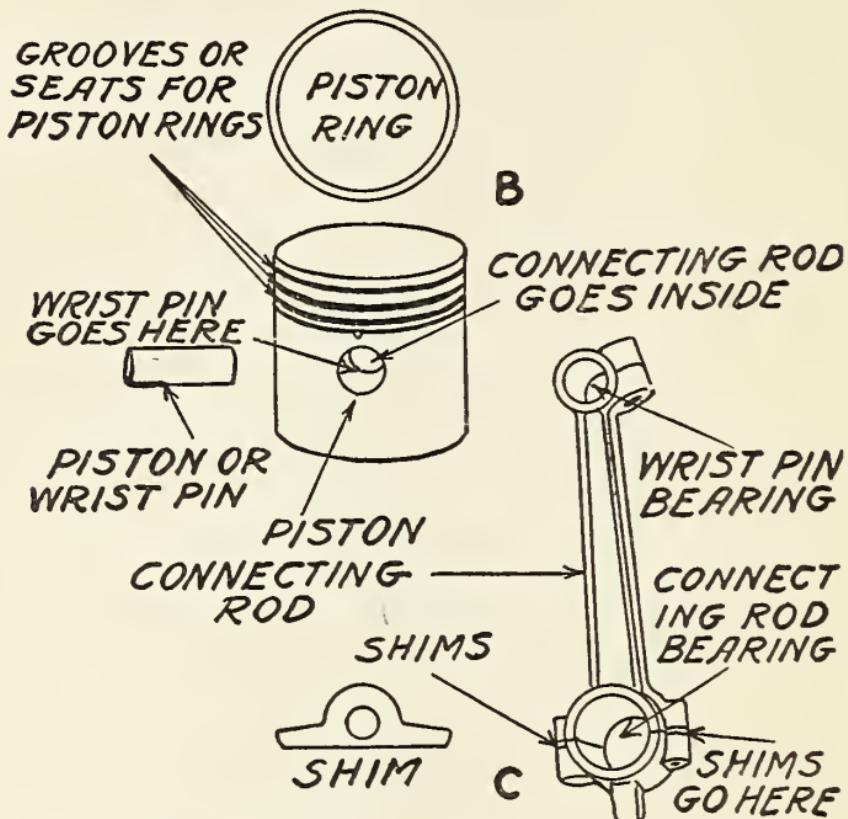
B. Piston, piston ring and wrist pin. C. Connecting rod and shim.
